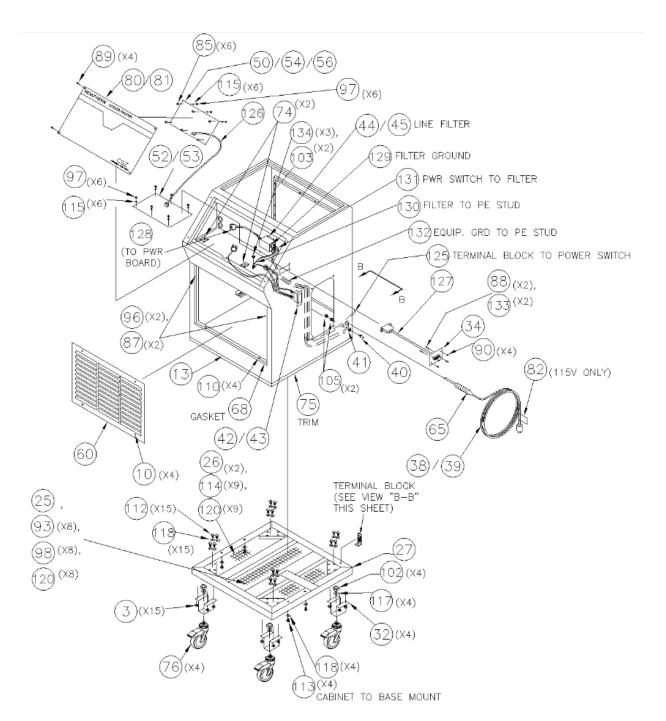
, FRONT ASSEMBLIES AND PARTS
